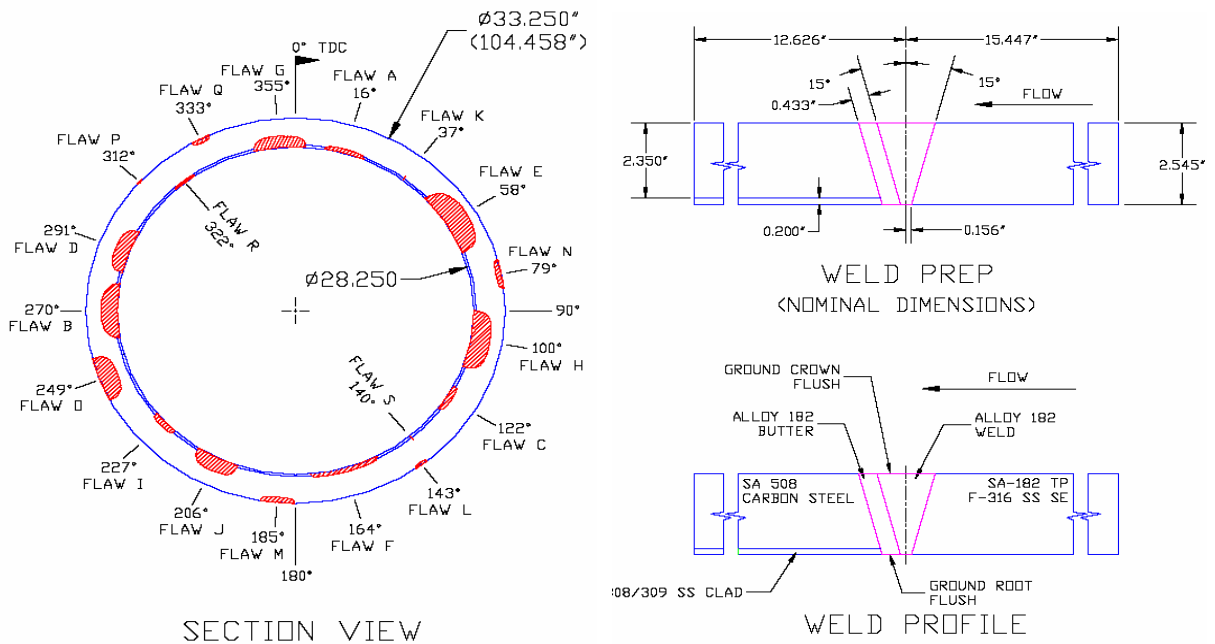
EPRI mock-up for dissimilar metal weld inspection (Alley 2002).
